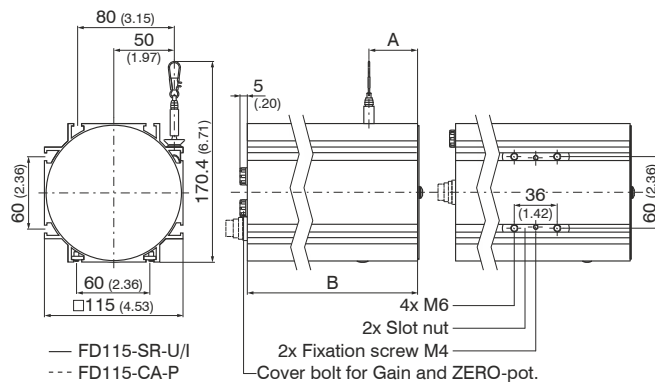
Dimensional drawing ... - FD115 - U/I/P, measuring ranges 7,500 ... 15,000 mm dimensions in mm (inches), not to scale
